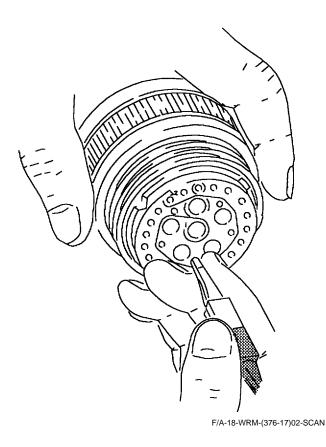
Unlocking Contact Retention Mechanism of Broken Wire Contact
